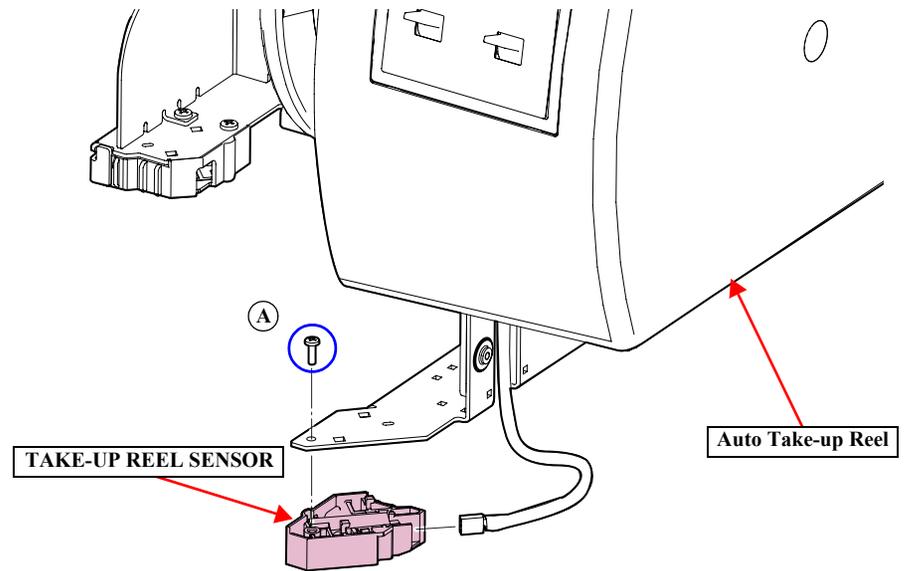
Removing the TAKE-UP REEL SENSOR
